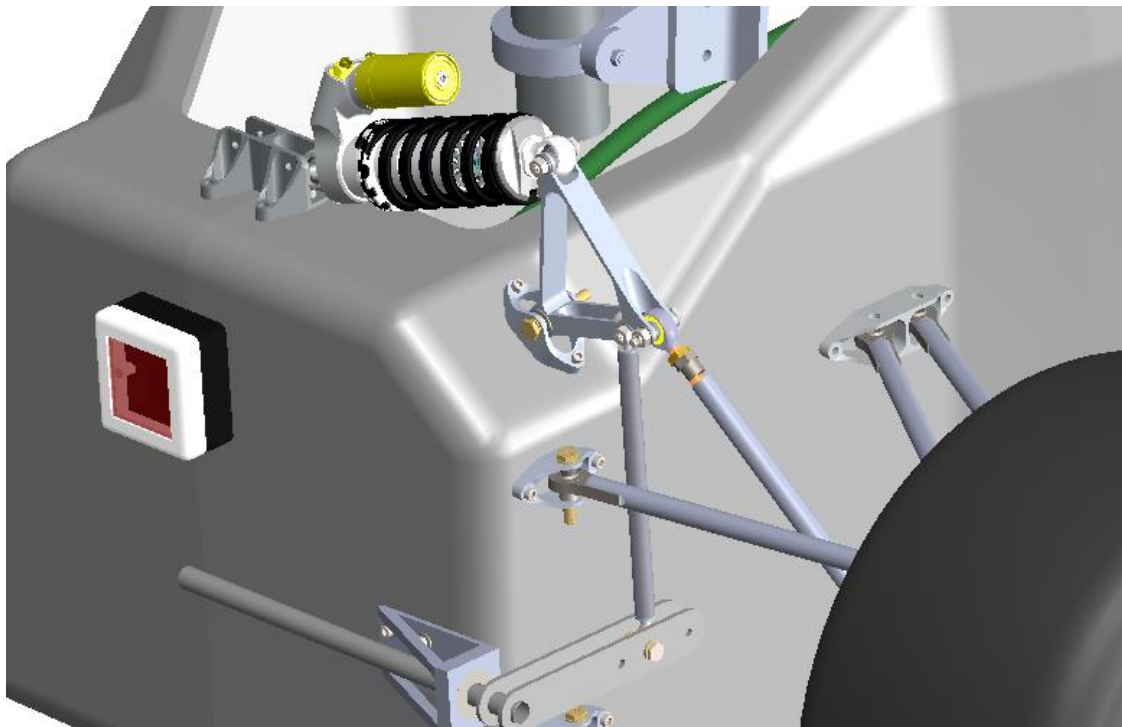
Rear suspension package. The rocker and shocks are mounted on the chamfered rocker "shelf".
